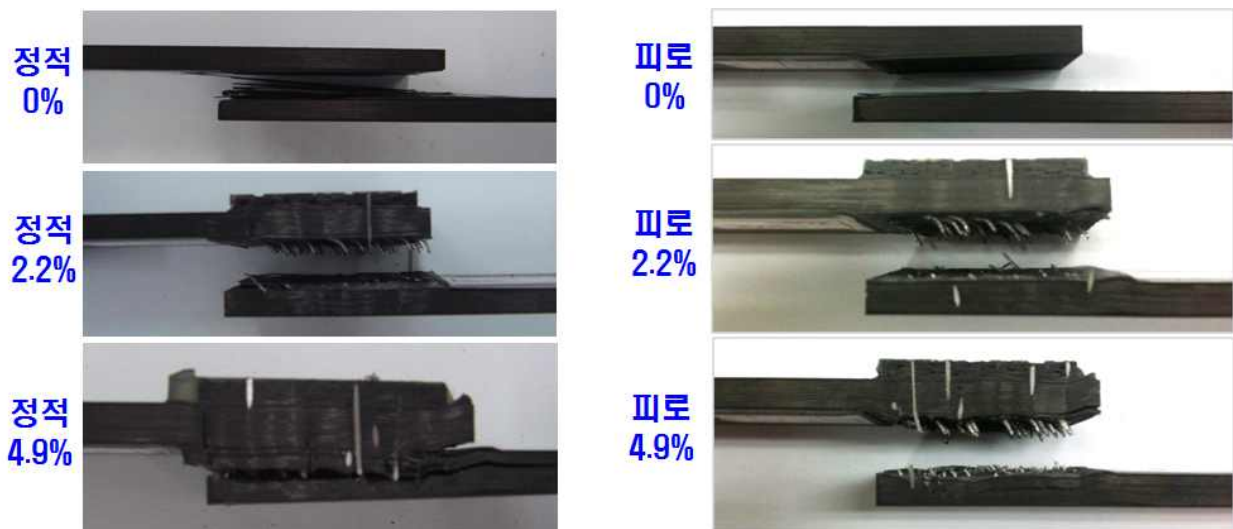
Failure shapes of single-lap shear joint specimens under static loading and cyclic loading
